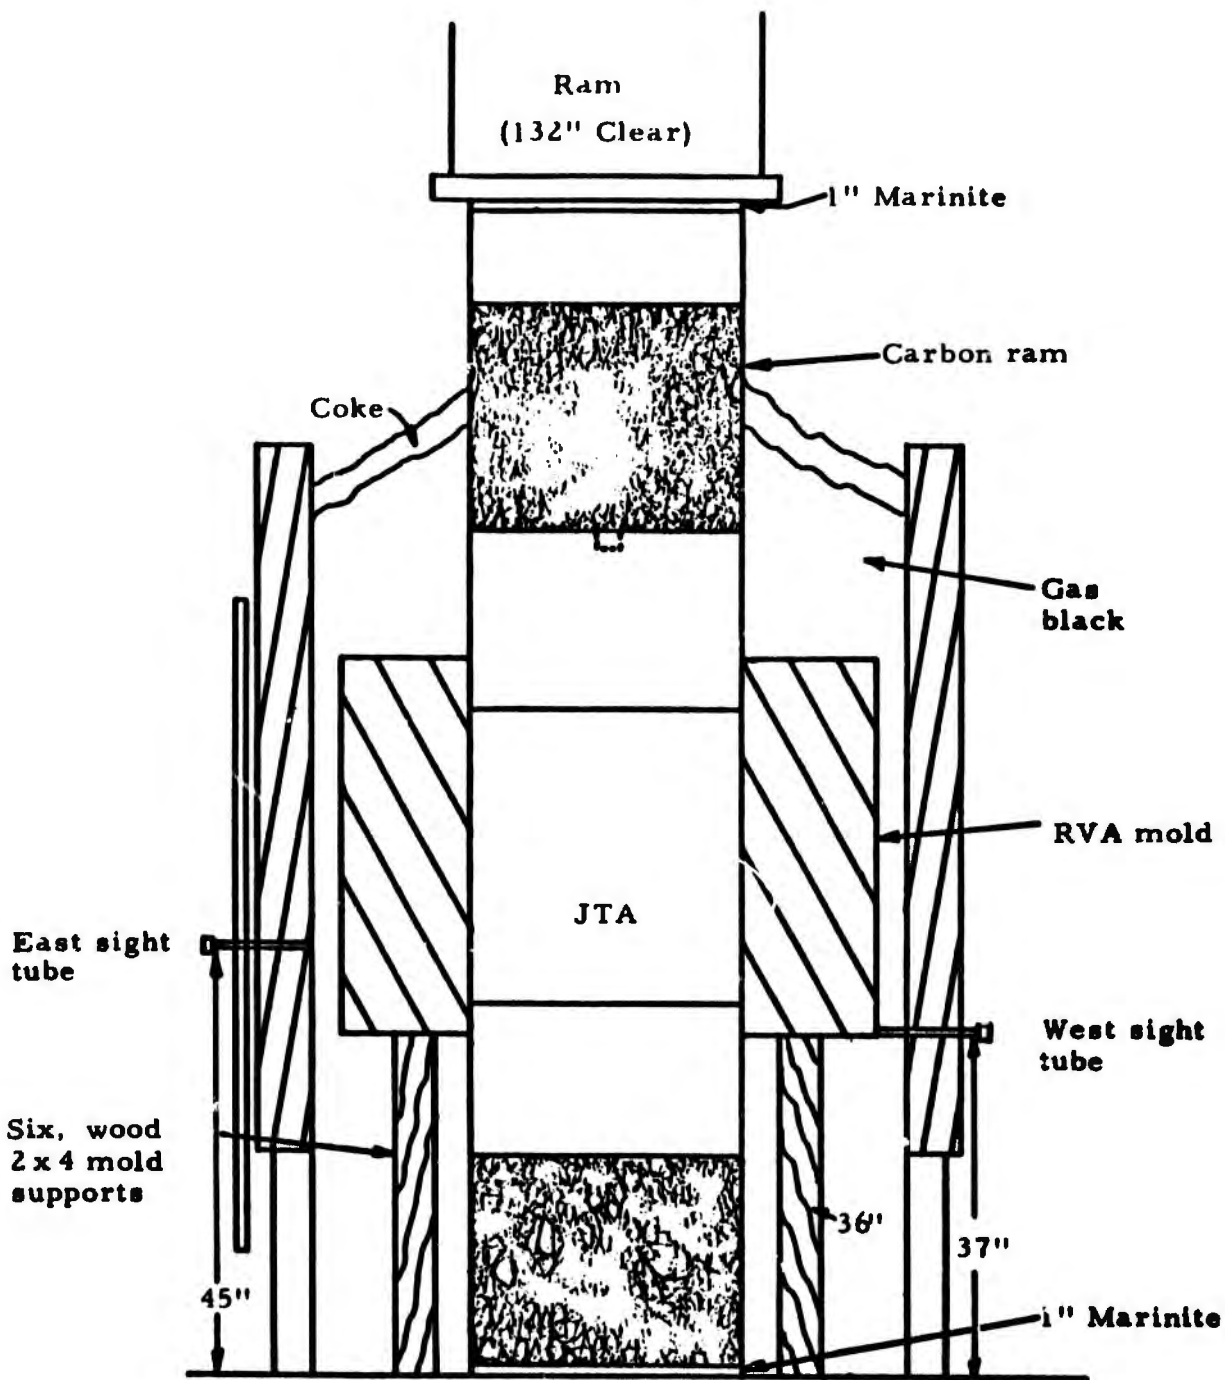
Position of Assembly Components at Beginning of Pressing 29-in. o. d. Solid Billet. N-20932
